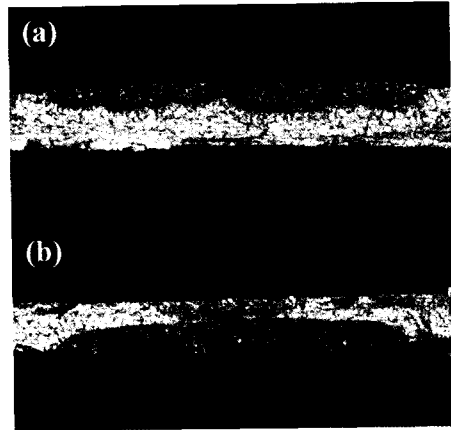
Example of fracture surface; (a) OA31, (b) IA11
